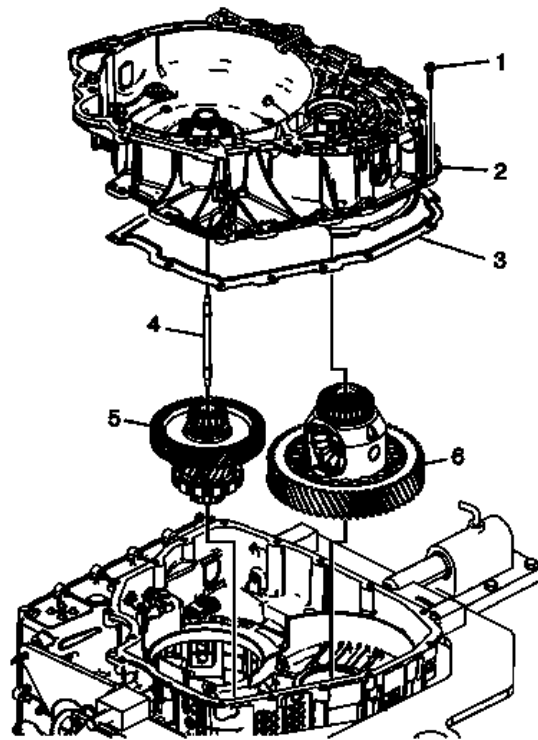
Identifying Torque Converter, Differential Housing, Front Differential Transfer Drive Gear & Front Differential Carrier
